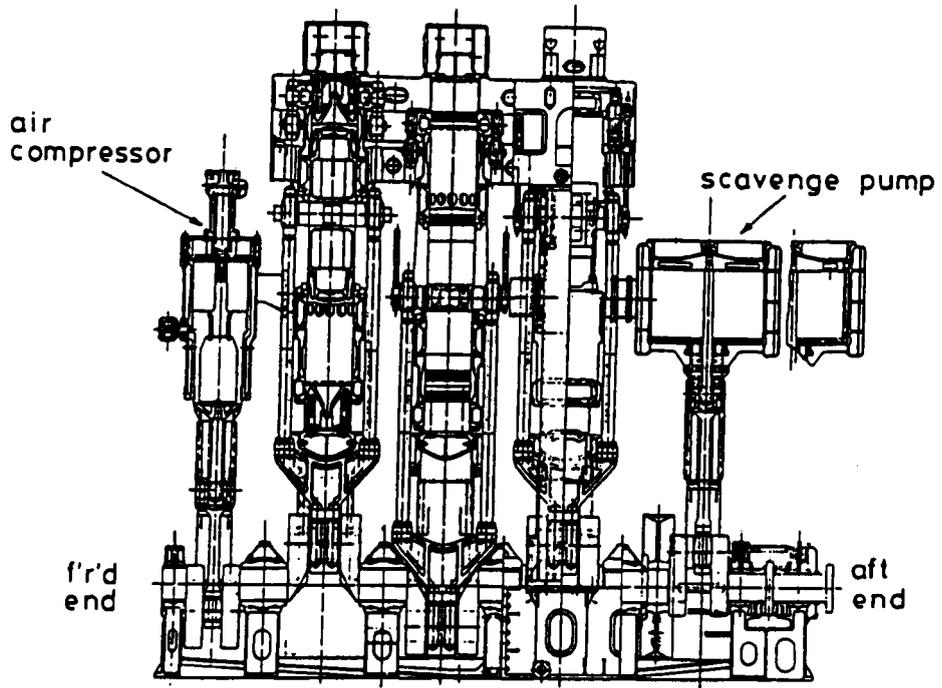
b.7 Section through NBDEW Sliding Cylinder Engine
